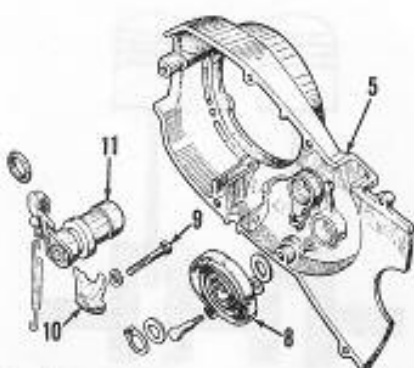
Crankcase cover and related parts. (View reversed from Fig. HN8-11).
